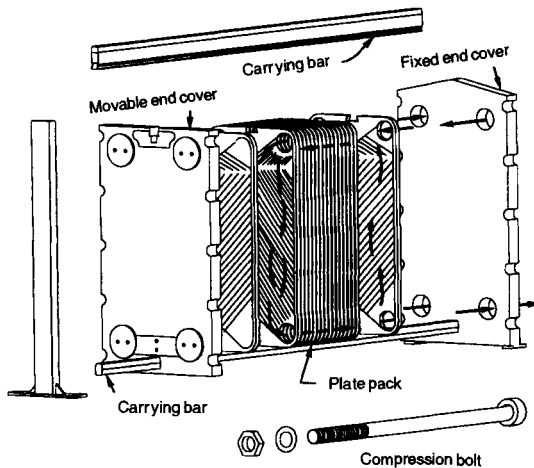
A plate-and-frame or gasketed plate heat exchanger.
